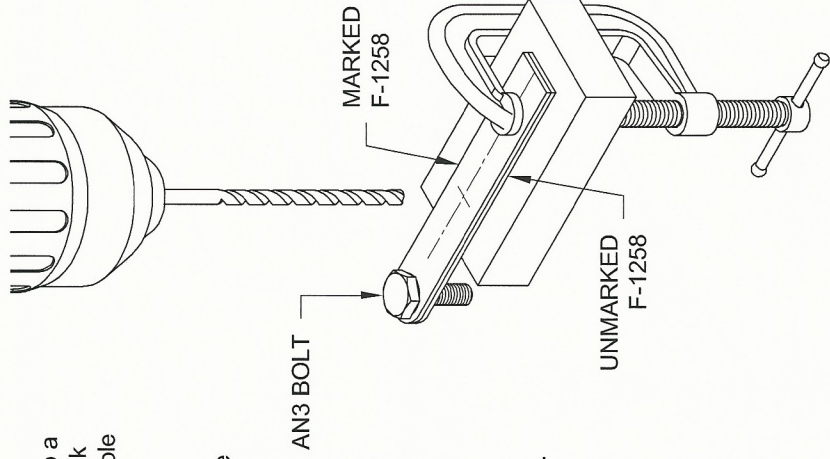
DRILLING THE RUDDER CABLE LINKS
